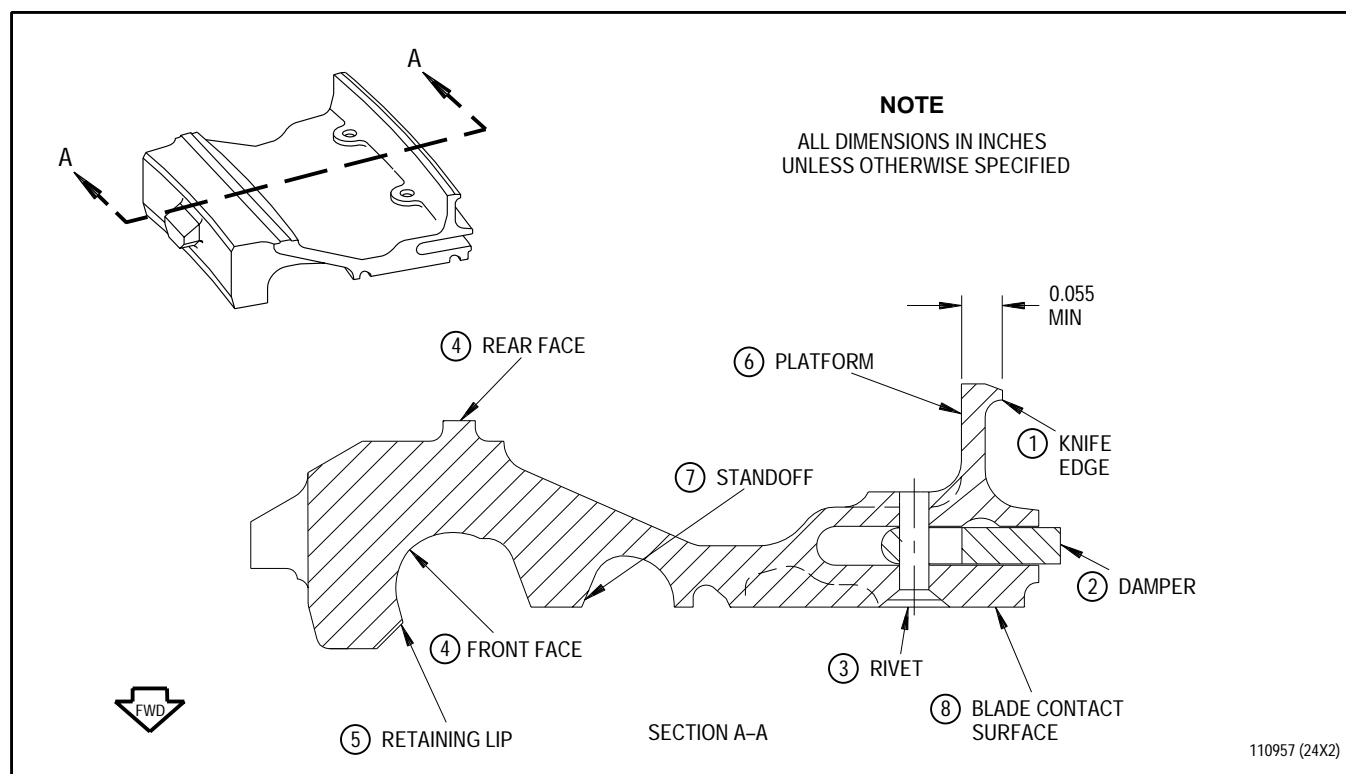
First Stage Turbine Blade Rear Retaining Plate Assembly
